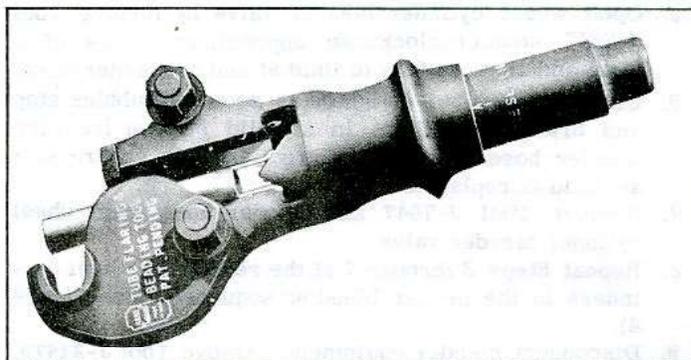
Hydraulic Brake Tube Double Flaring Tool
